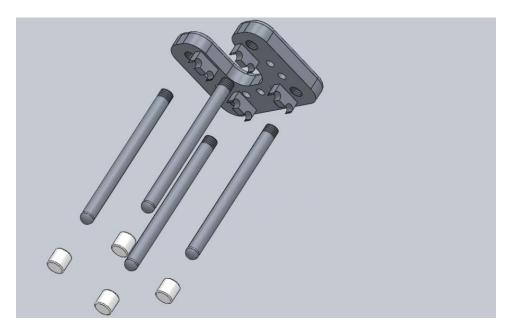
The above figure displays our portable shower seat in the exploded view, where all 9 parts may be easily viewed.
